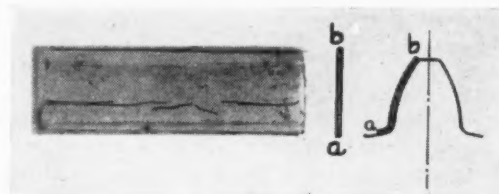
SURFACE FRACTURES RESULTING FROM GRINDING
